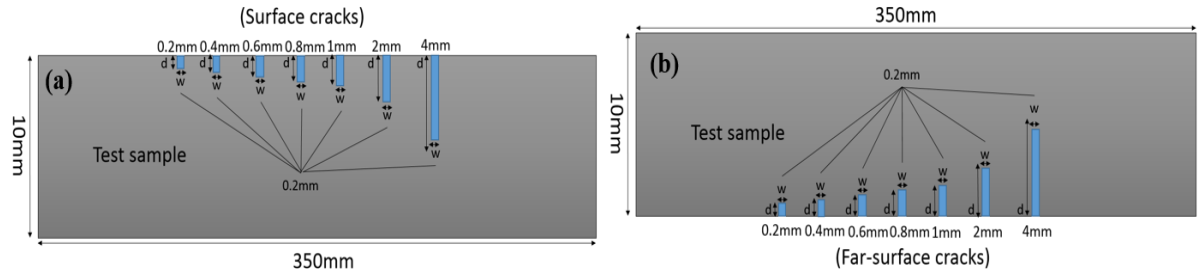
A schematic layout of the test sample with; a) surface cracks and (b) far-surface cracks.
